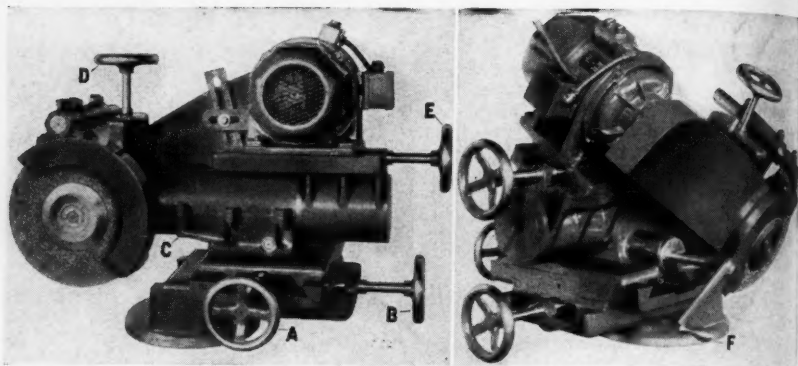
(Left)—Hisey Portable Motor Driven Worm Thread Grinder. Fig. 2. (Right)—View showing angular adjustment for grinding head.
